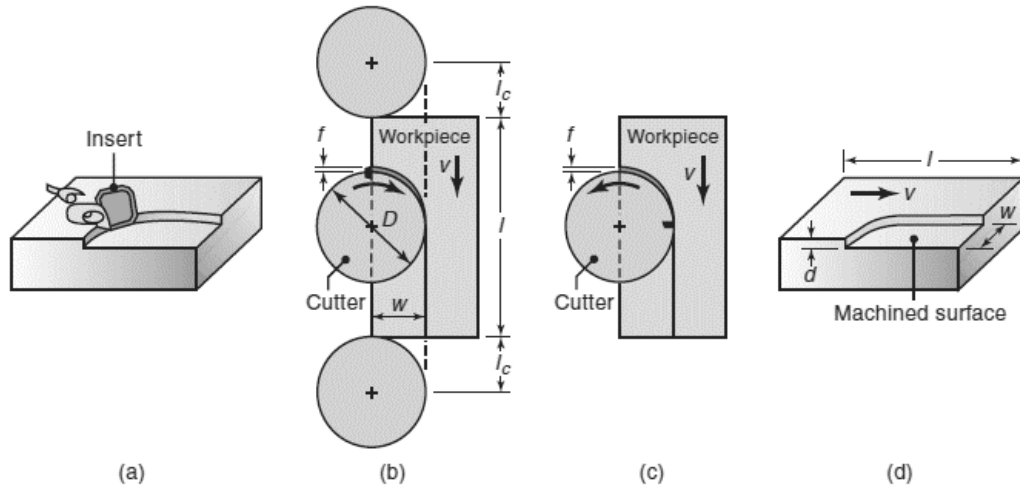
Face milling machining, showing (a) the action of a cutting insert; (b) climb milling; (c) conventional milling; (d) machined surface with face milling dimensions [110]
